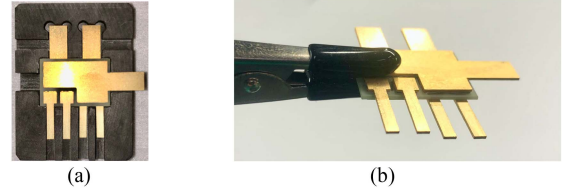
Fabricated compact-interleaved SiC power module. (a) Power module with the fixing fixture of graphite boat. (b) Overall illustration of power module.
